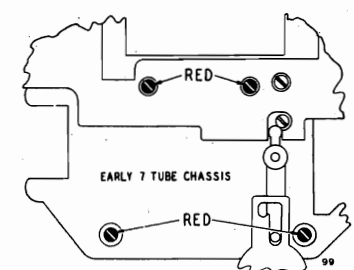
Location of 4 Red Mounting Screws in Early Models
